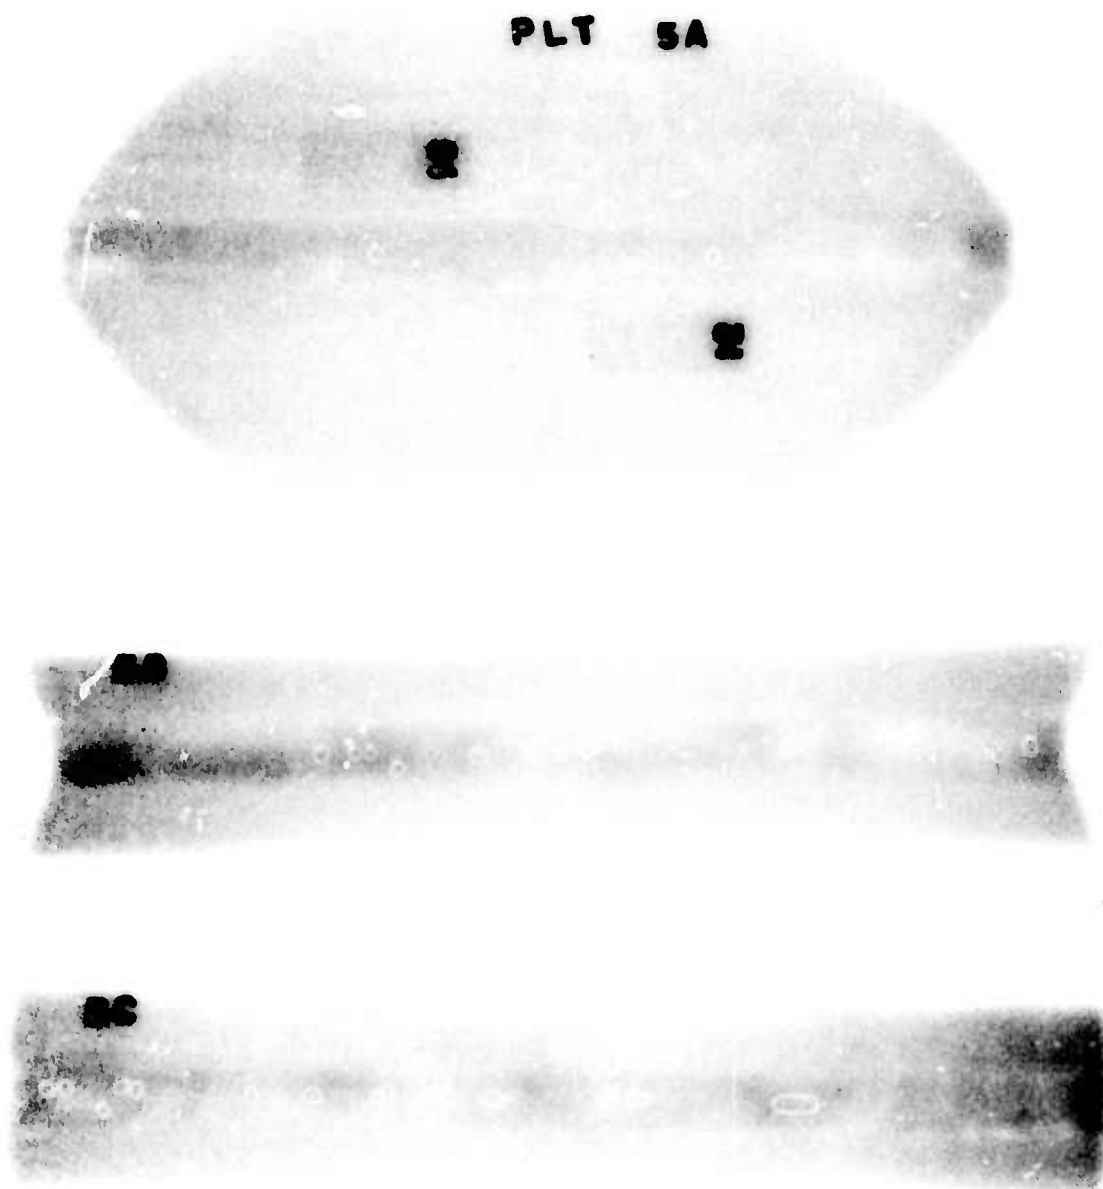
22 - Photographs of GTA weld radiographs
